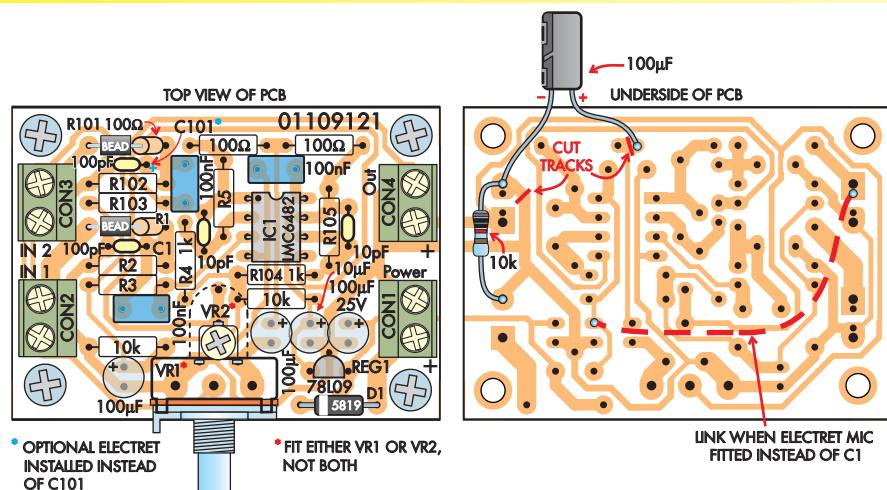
follow this layout diagram to assemble the PCB. It's best to cut the tracks first and then check with a continuity meter before fitting the parts.
